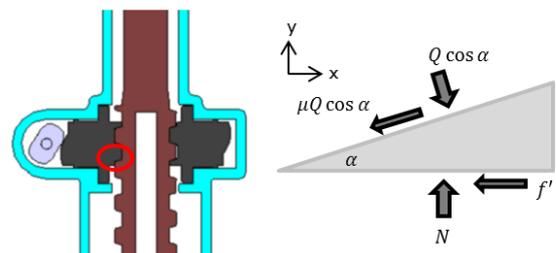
Thread Gear Boundary Conditions for Wheel-Rod
